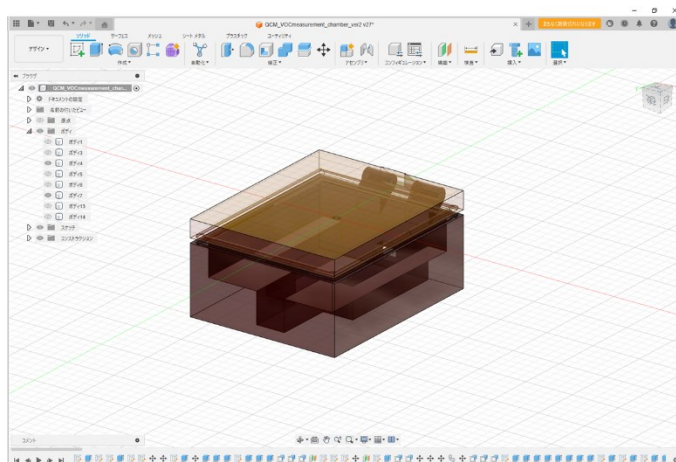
Designed VOC measurement device with QCM sensor using Fusion360.
